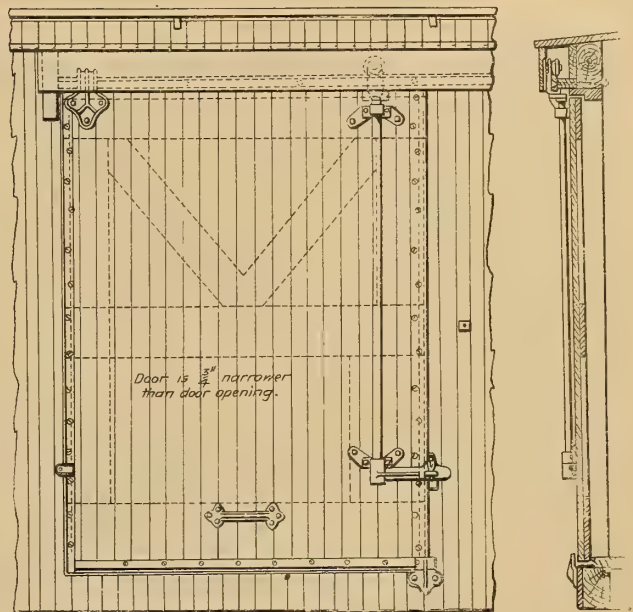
BAGGAGE CAR SIDE DOOR. N. & W.
